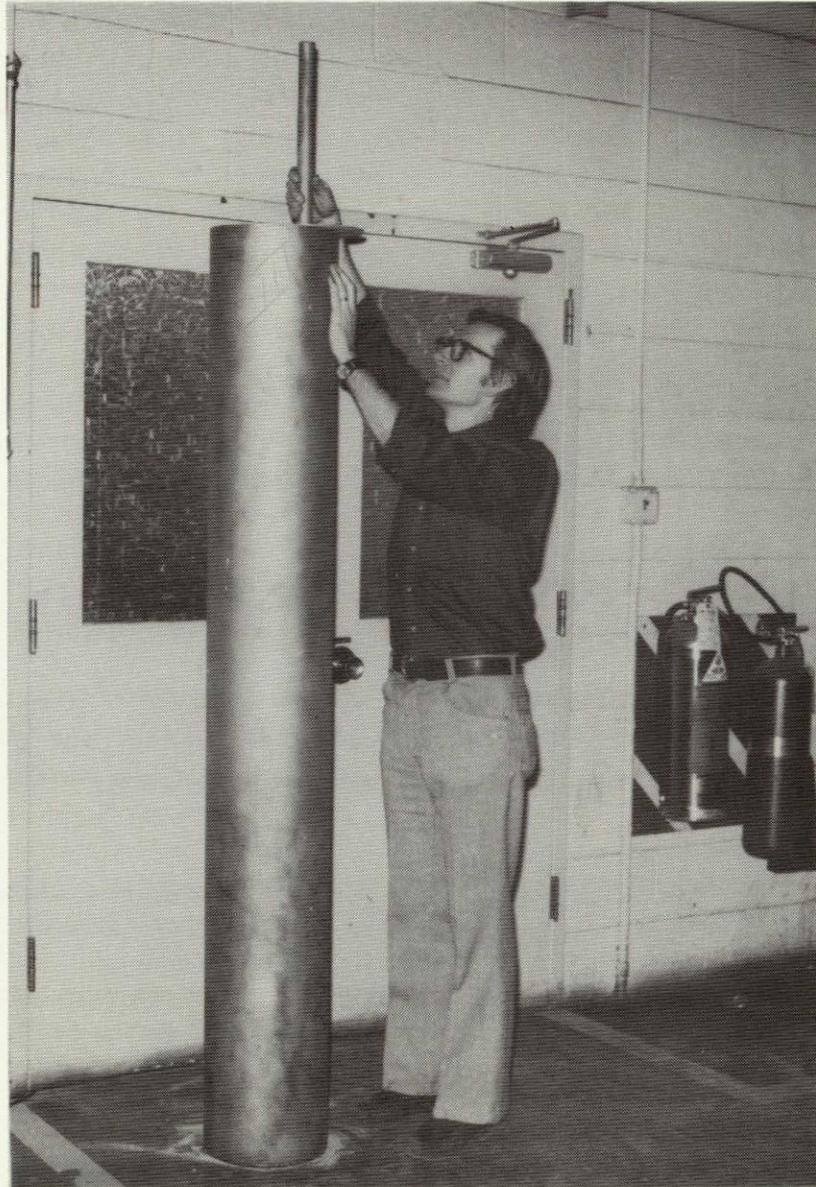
Can Assembly Used for Gas Pressure Bonding.
